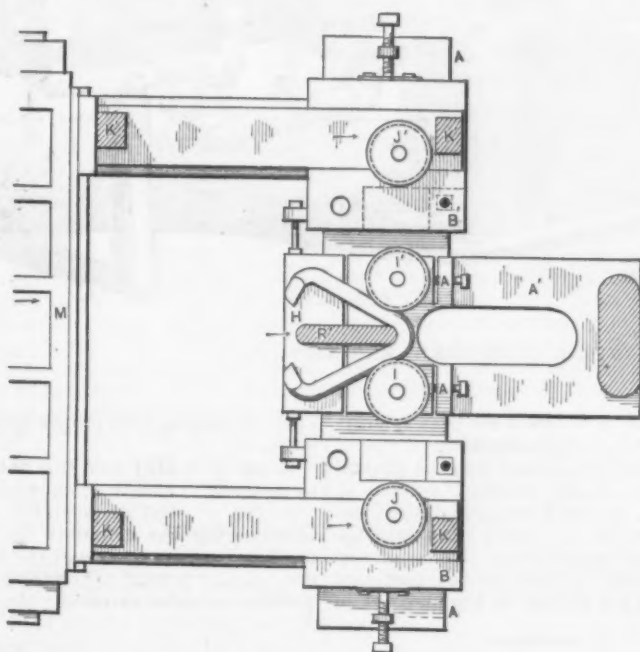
Similar to Fig 5, but Showing the Bending of Link.
